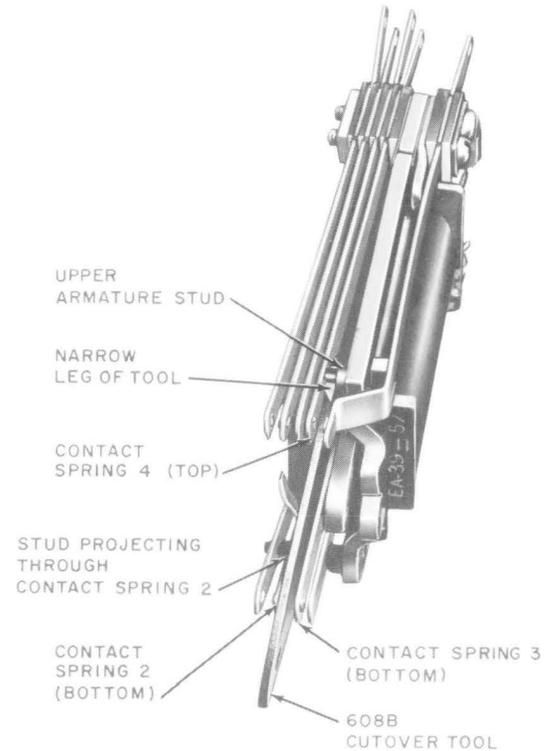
Blocking EA39 Relay for Cutover Purposes
